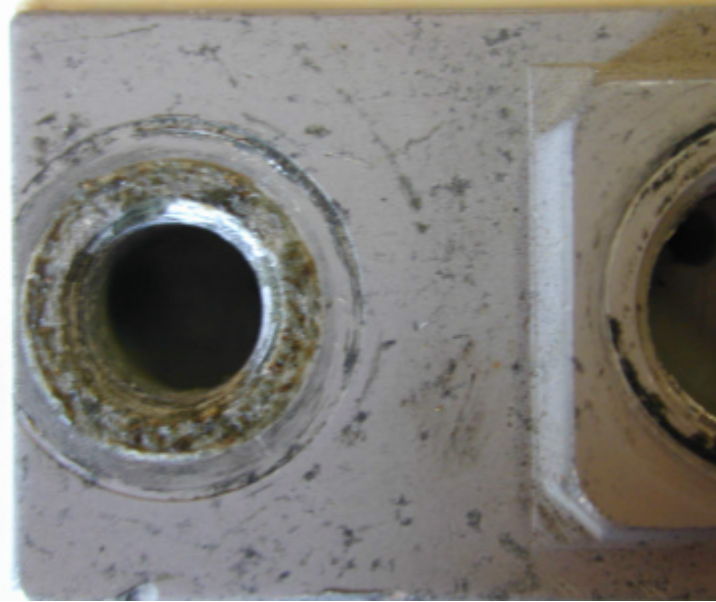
Pitting Corrosion on MB-326 Balance Tabs
